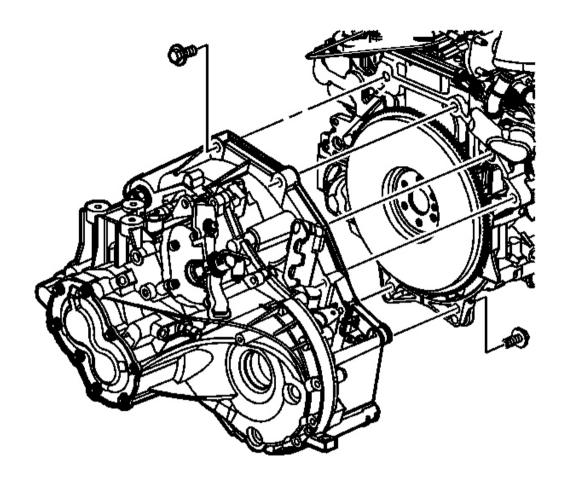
Transaxle Housing & Bolts Courtesy of GENERAL MOTORS CORP.
